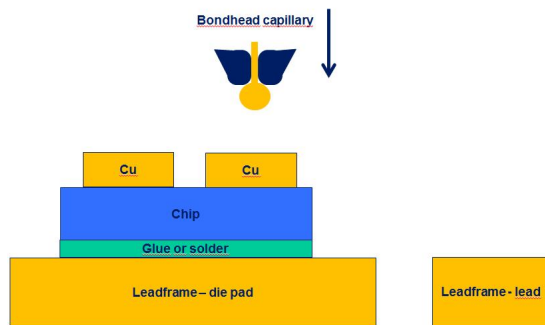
a: Cu ball-wedge wirebonding process principle; a Cu ball is formed from the Cu wire by an electric torch.
